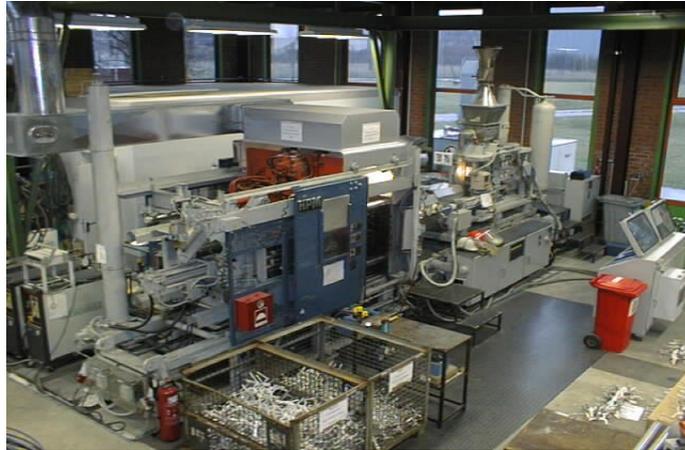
Thixomolding® machine of University Duisburg-Essen
